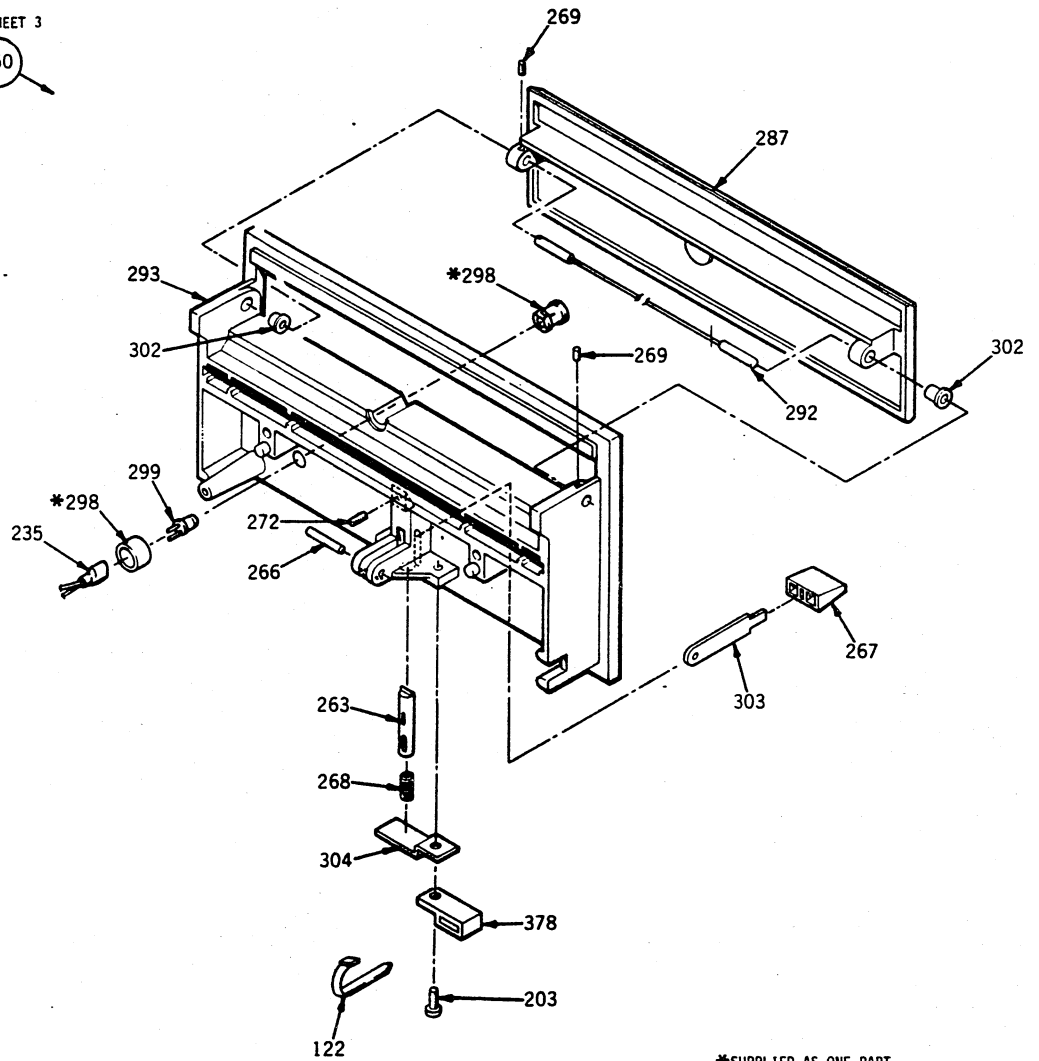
FRONT PANEL ASSEMBLY (SHEET 1 OF 2)
